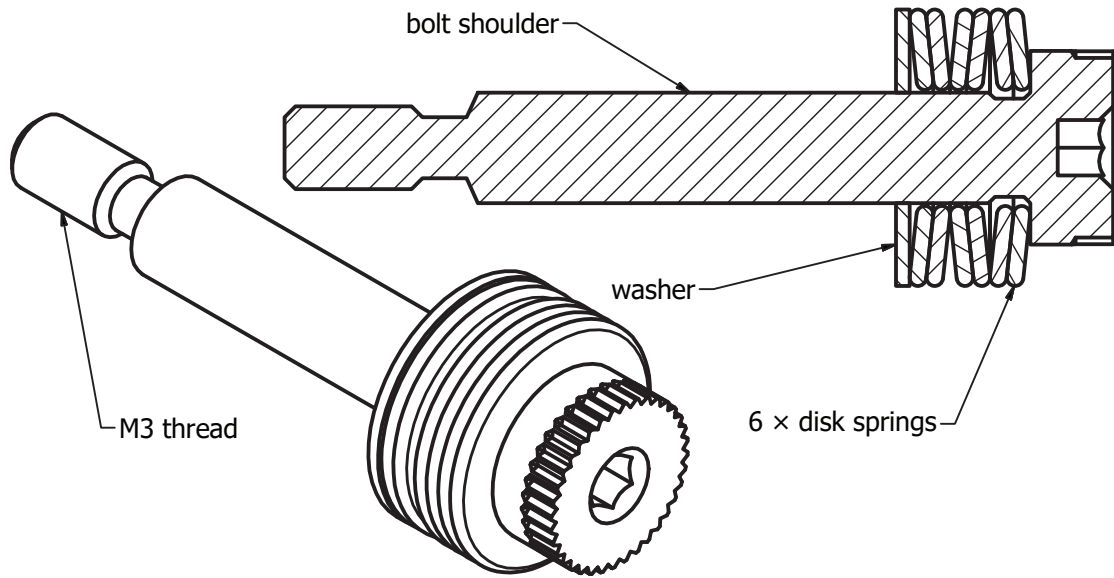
Schematic isometric (left) and cross sectional view (right) of one of the shoulder bolts with disk springs.
